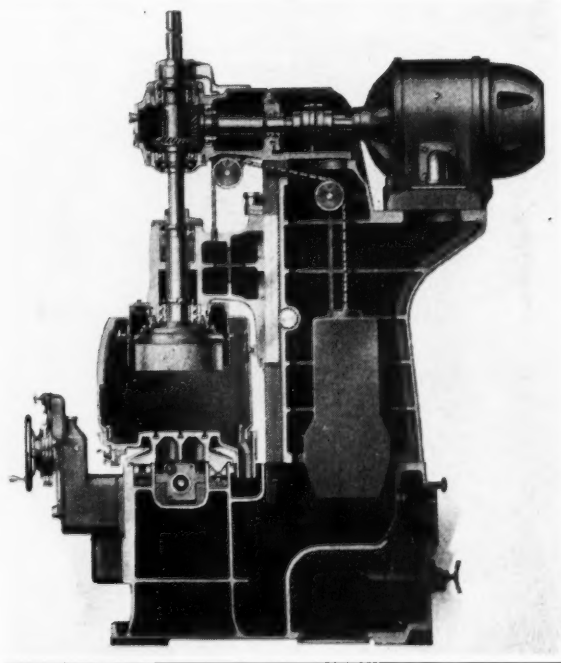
Sectional View of the Surface Grinder, Showing Details of Inside Mechanisms
